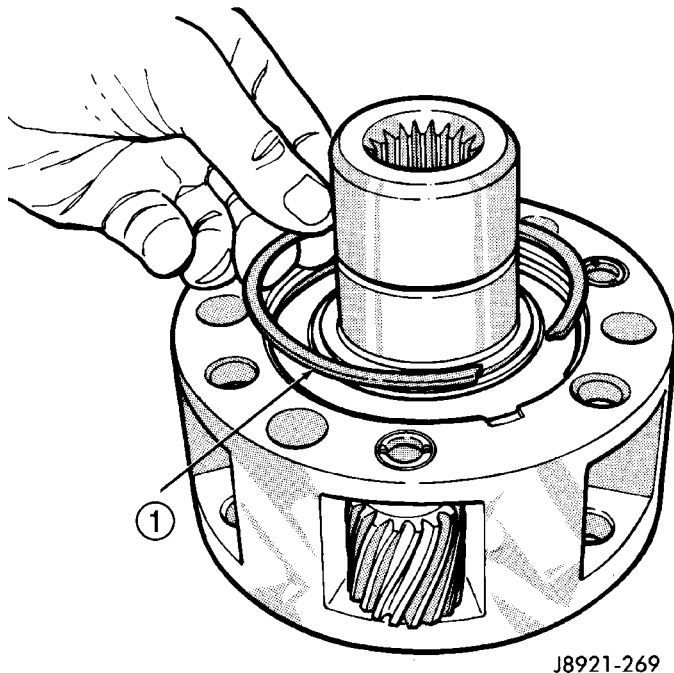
Low Range Gear Snap-Ring Removal/Installation
